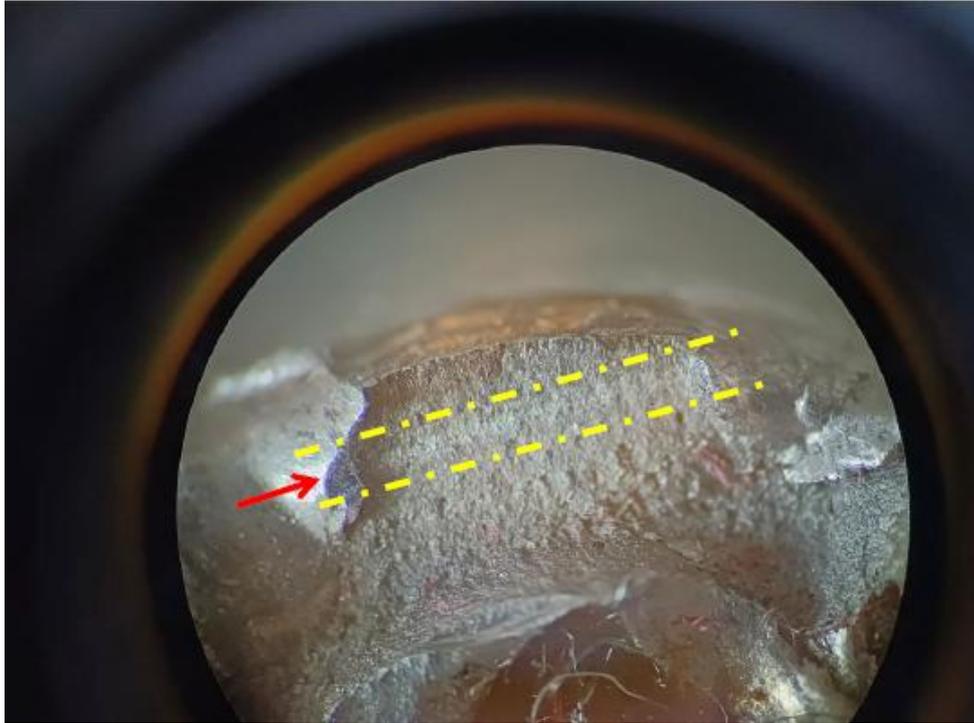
The fatigue fracture striations that formed as the fracture progressed during numerous operation cycles. (Source: AMO)
